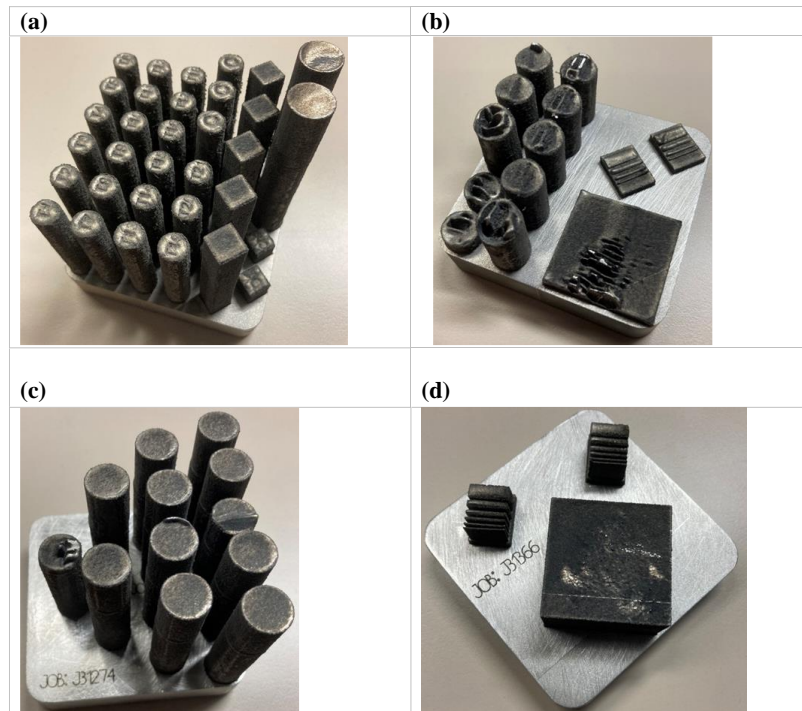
Breadboard printing with the optimized parameters. Larger prints were not successful as it can be observed from the blackened surfaces and the uneven top surfaces of some of the specimens.
